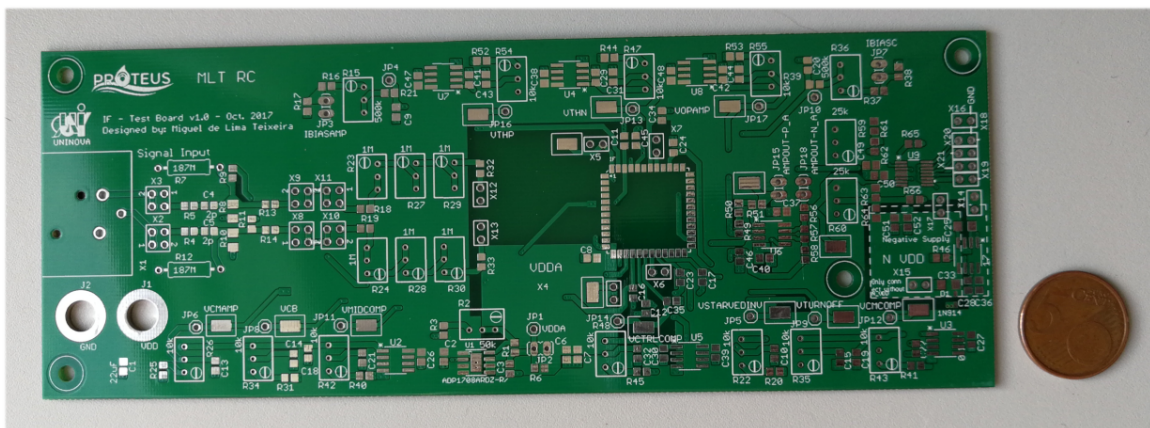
Unpopulated PCB IFC prototype test board, front.
